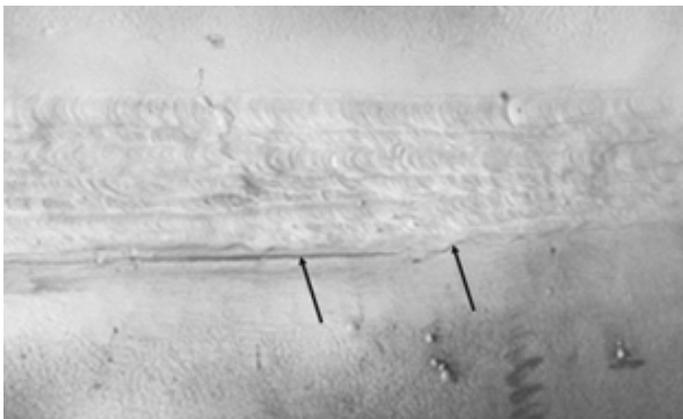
Girth weld with visible crack from the edge of the weld under the weld face (MT)
